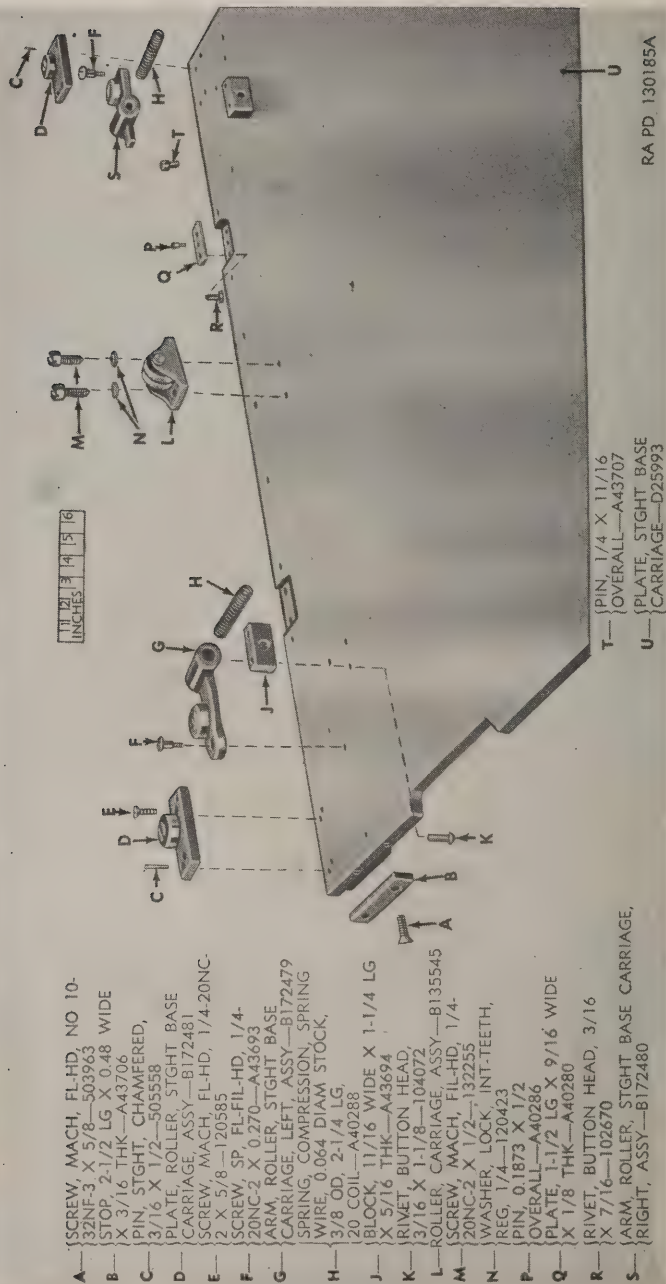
Components of straight-base carriage assembly—sound-ranging plotting board M1 or M1A1.
